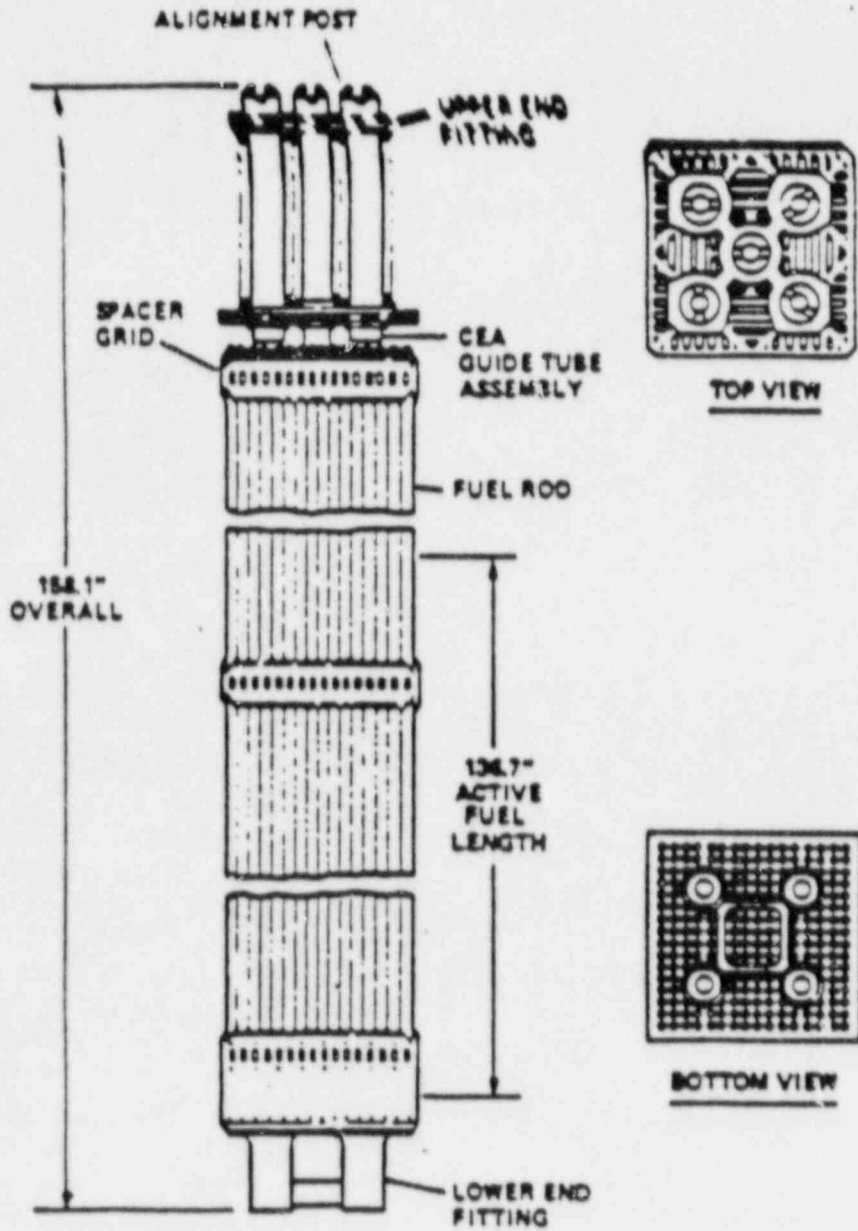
Combustion Engineering Fuel Assembly, Unit 2
